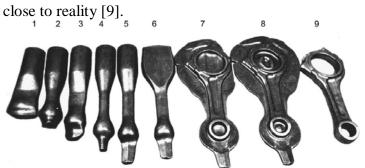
Workpieces after forming stages 1–9 (from left toright). 1–5: stretch-rolling, 6: flattening, 7,8: die-forging, 9: flash removal and hopunching
